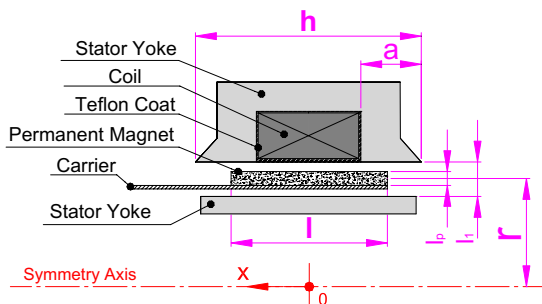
Definitions of the geometrical dimensions of the moving magnet linear motor.
